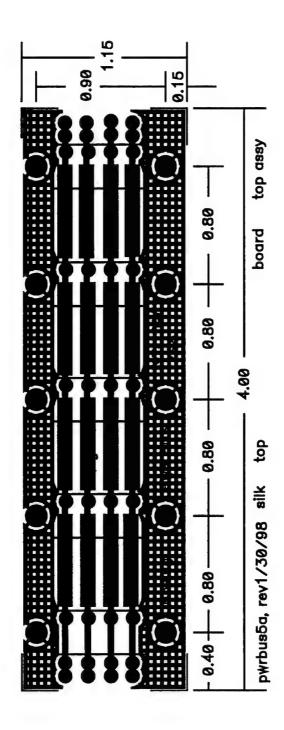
Printed Circuit Layout of DC Power Board
